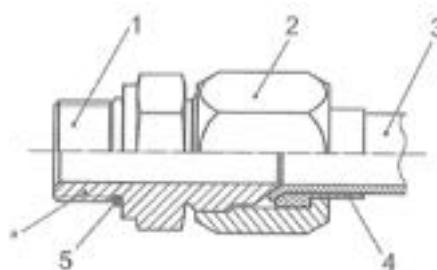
Cross-section of typical 24° cone connector with O-ring seal cone (D80) end
